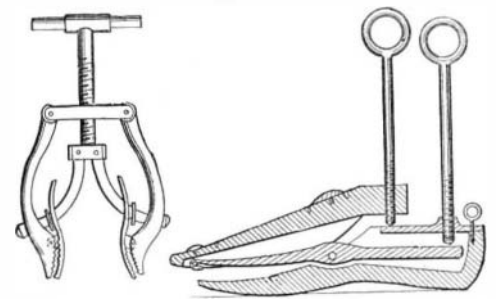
BOOT SHANK MACHINE, used for drawing the leather of the upper or boot leg over the last into the hollow of the shank.
